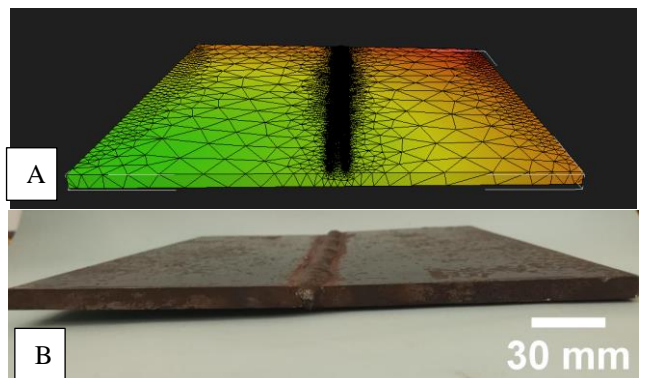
Deformation; (a) FEA, (b) Post-Welding
